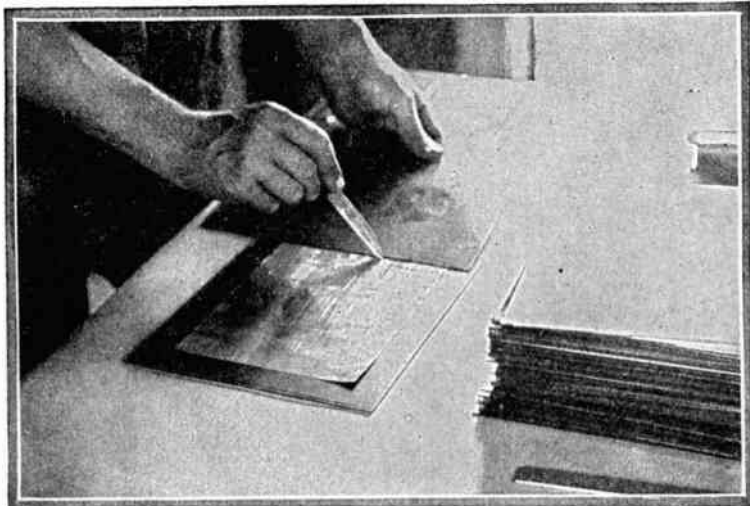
Cutting the strips to the right size. A sheet placed under the glass is used as a guide
